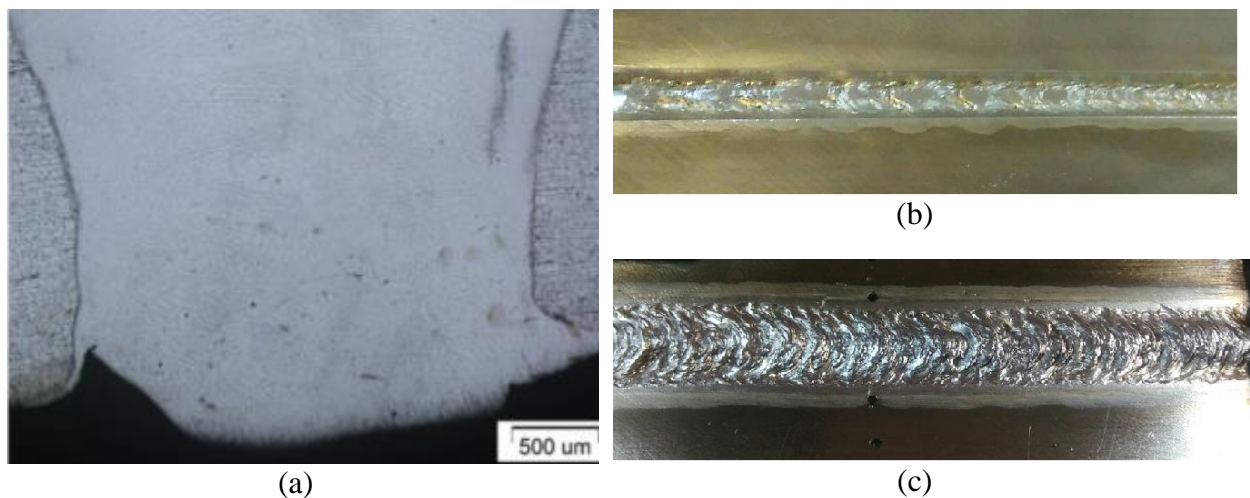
Macro section of a 2-pass weld made with filler wire EP533 (a) and the appearance of the front side of the weld after the first (b) and second passes (c)
